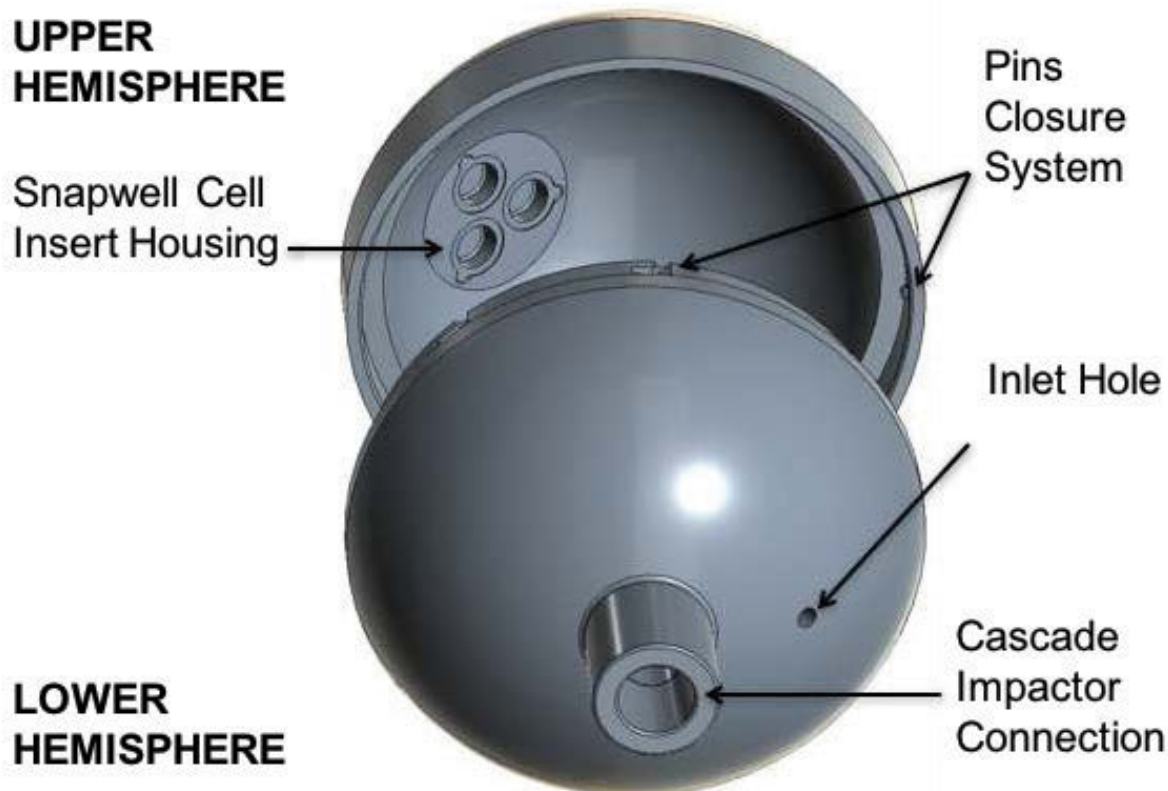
CAD 3D drawing of the Modified Expansion Chamber. Modified from Chapter 3.
